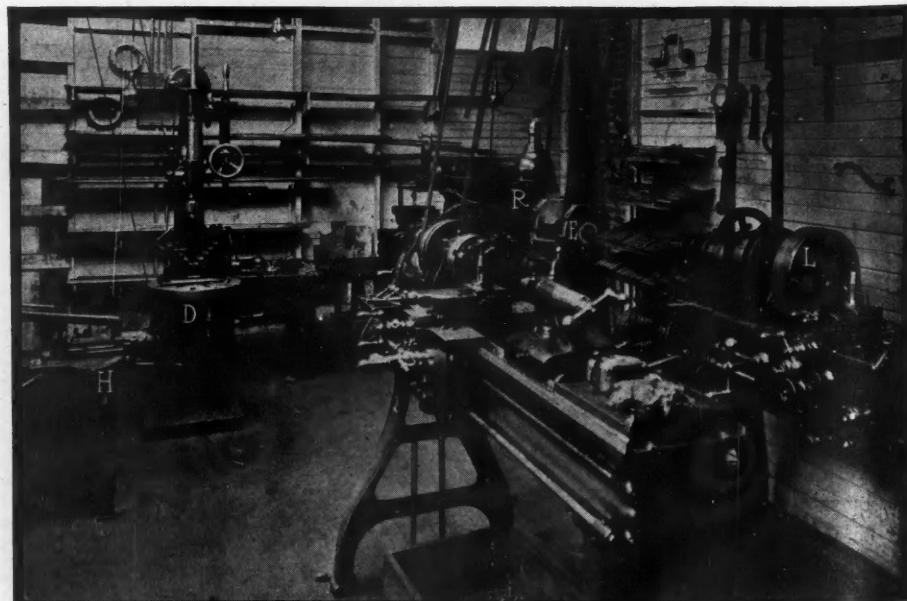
VIEW OF MACHINE TOOL EQUIPMENT OF ALCO REPAIRSHOP, CHICAGO
